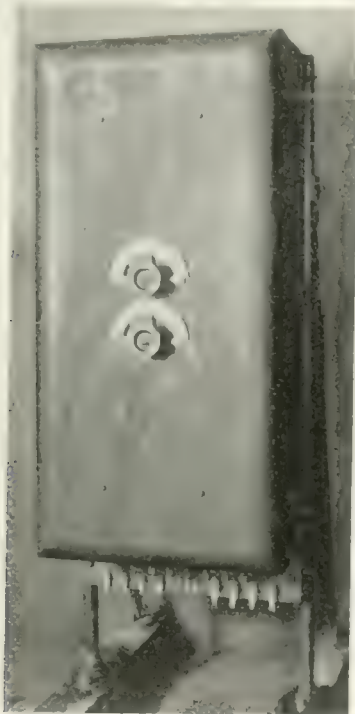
MAGNETIC TYPE CONTROL FOR REVERSING PLANER MOTOR
